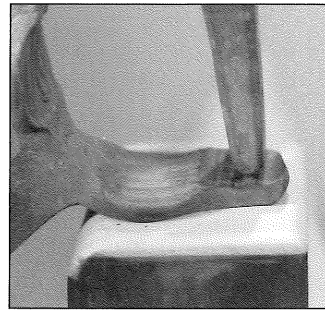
Fuller in the opposite direction to prepare the eye for forge welding
